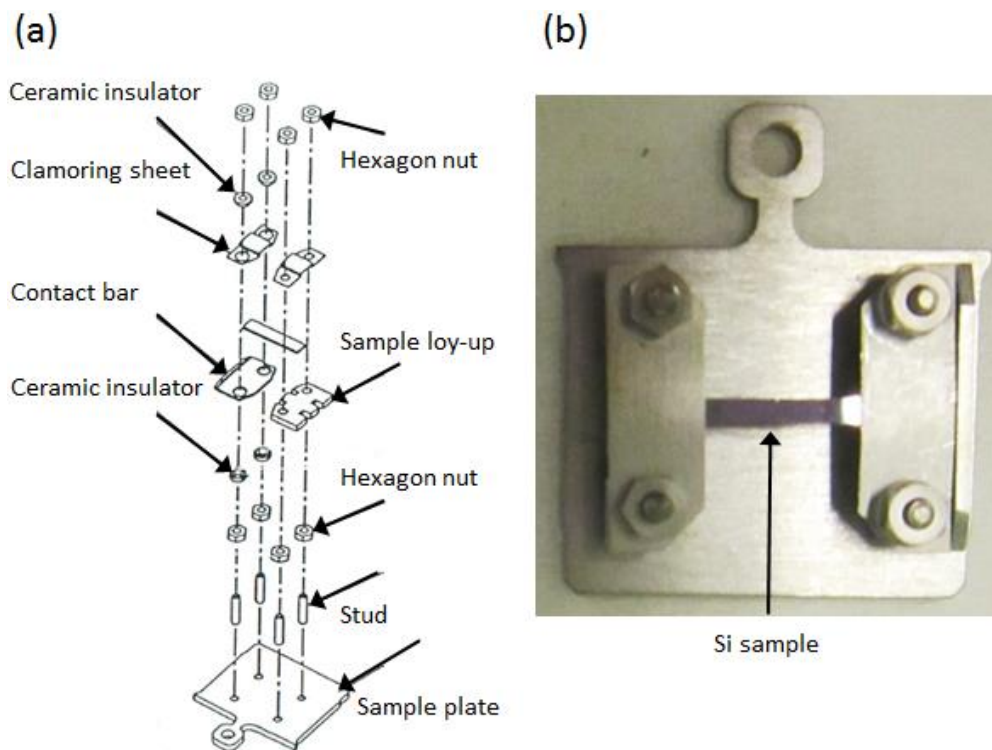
(a) The schematic diagram of the sample holder assembly (Omicron User Manual), and (b) photograph of a Si(111) chip ($11 \times 2 \text{ mm}^2$, 0.3 mm thick, from Virginia Semiconductor Inc., USA) mounted on the assembled sample holder.
